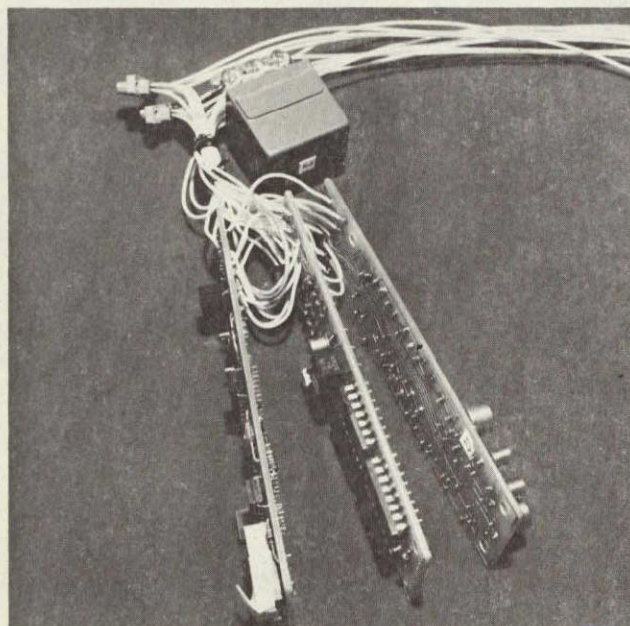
SCP FABRICATION, ASSEMBLY, AND TEST
